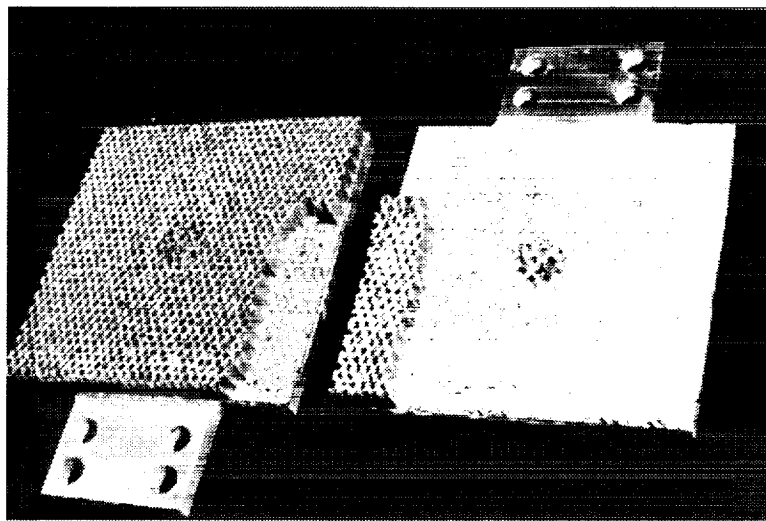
Photograph showing the typical bondline failure mode of the HRP specimens.
